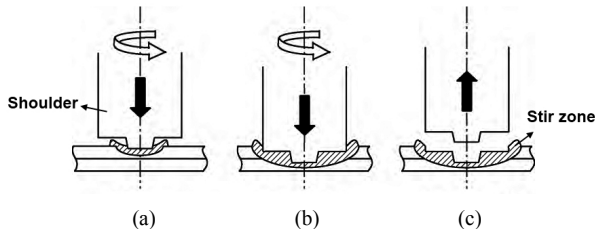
Schematic of welding by FSSW: (a) plunging; (b) stirring; (c) retracting.
